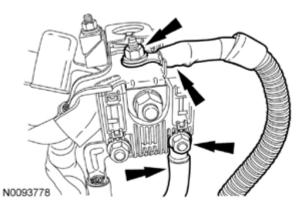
Locating Battery Cables And Nuts Courtesy of FORD MOTOR CO.
